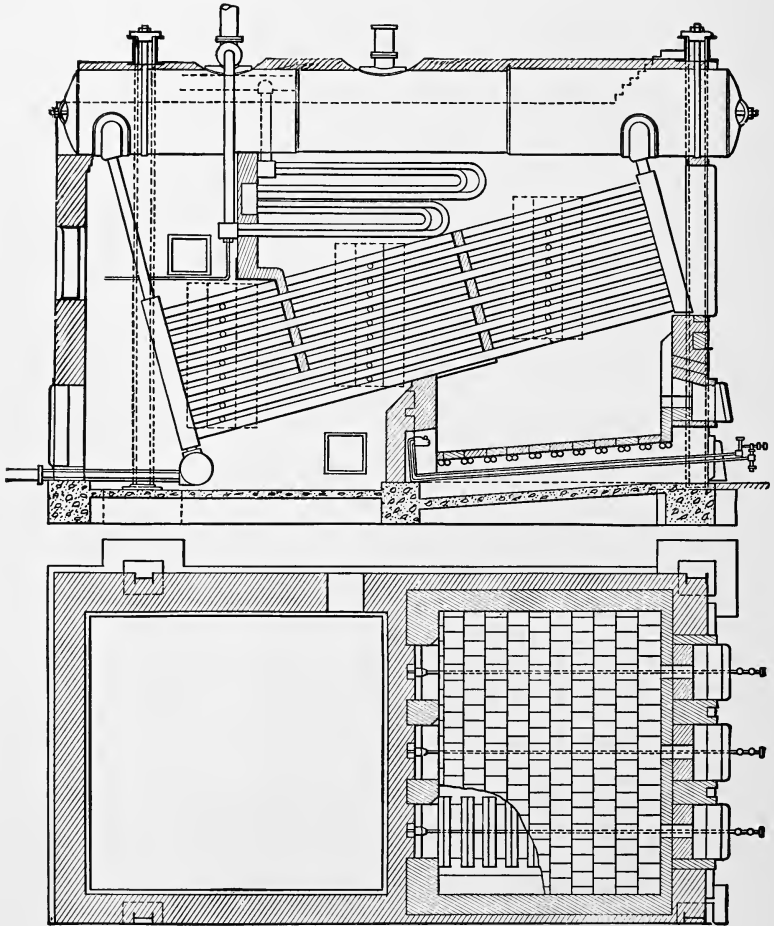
Furnace for Burning Fuel Oil, Rear Feed (Hammel).
